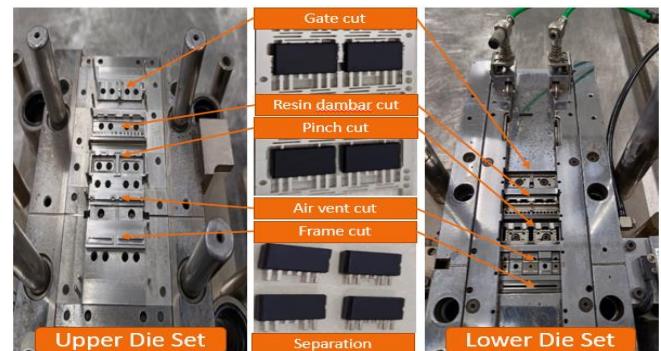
Trim and Form Tool with Progressive Shots of Package Integrated Circuit. From attached on the lead frame strip to separated and formed to finished product.
